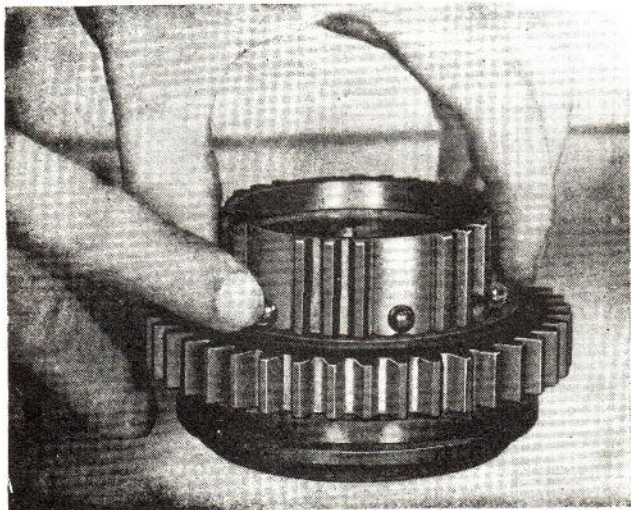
Fitting balls into synchro sleeve (second-speed).
